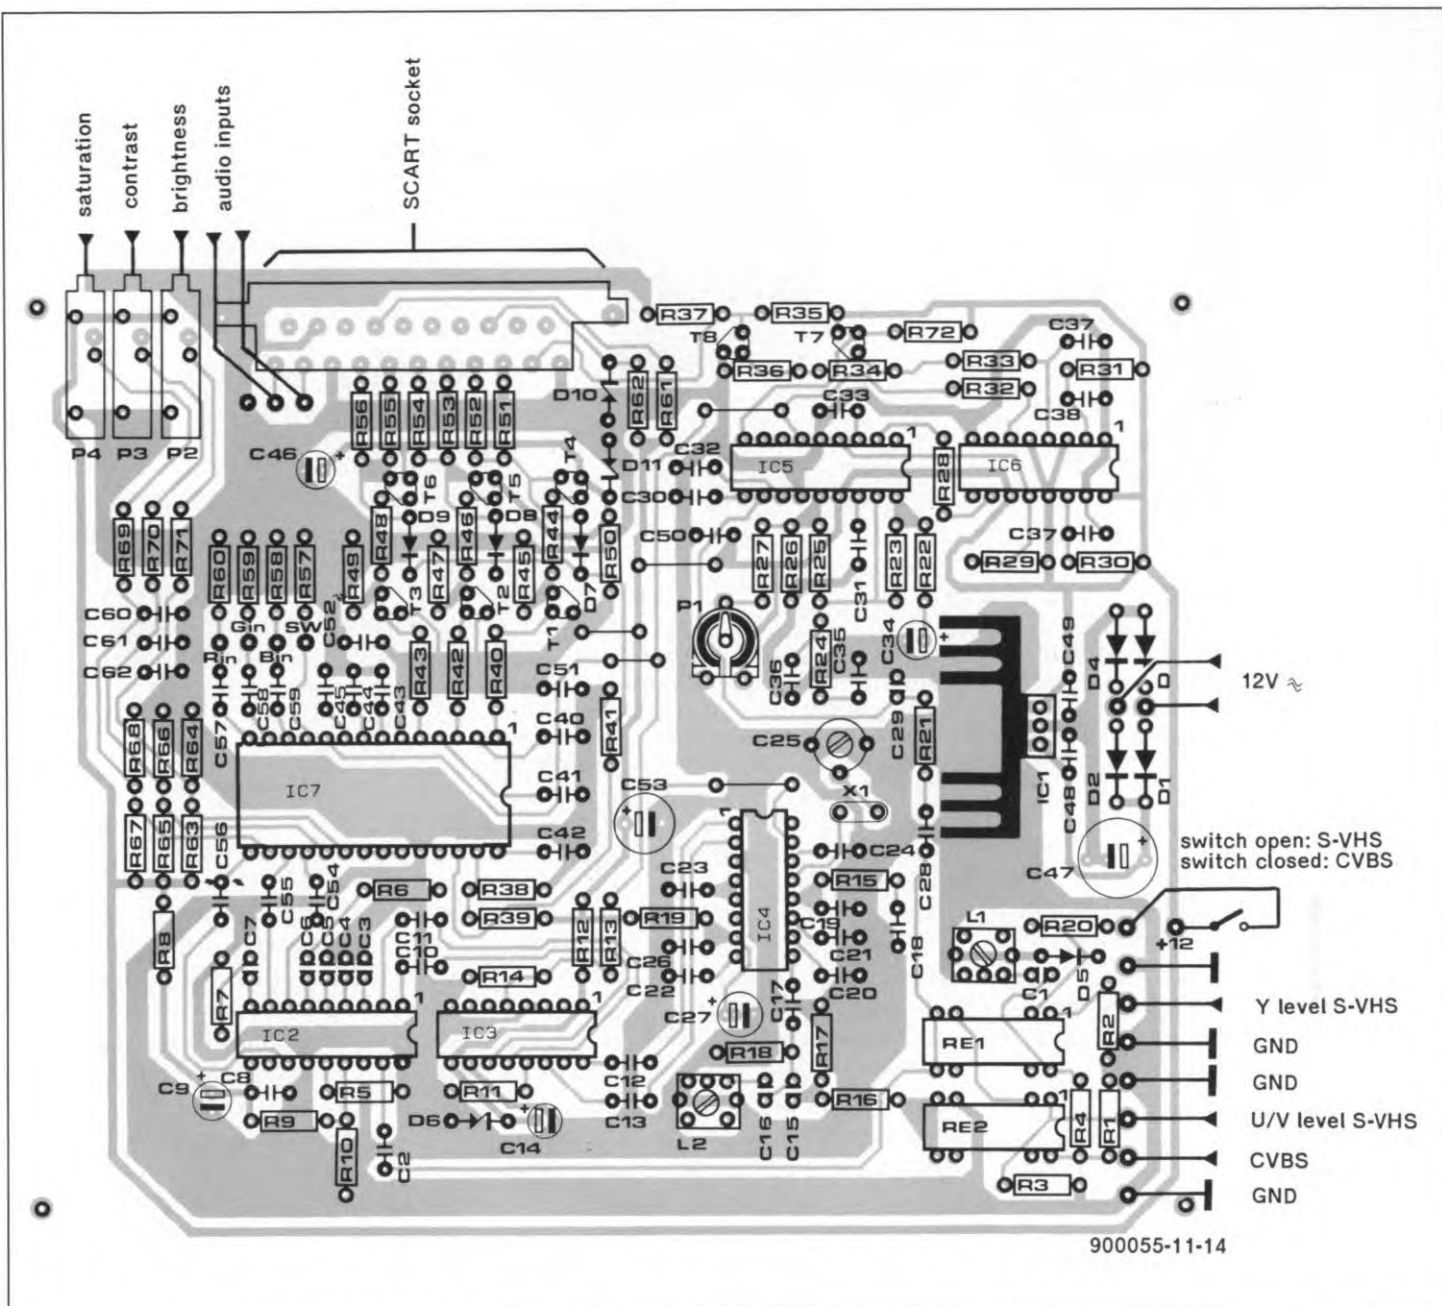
Component mounting plan of the printed-circuit board, and connections to external parts and video/audio equipment.
